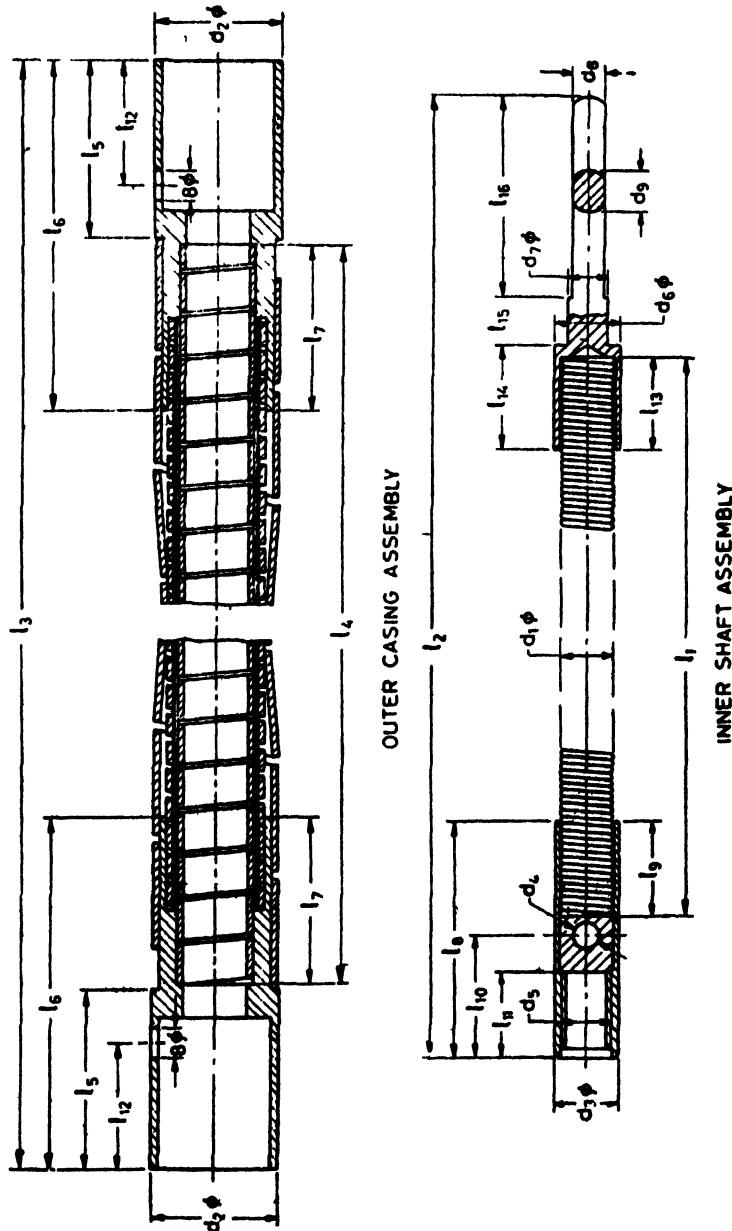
FLEXIBLE SHAFT ASSEMBLY
